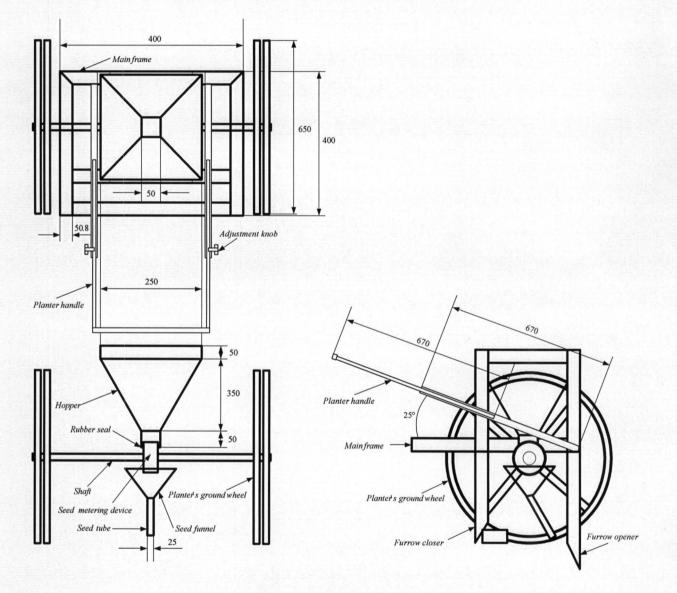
Diagram of the seed planter showing all the necessary dimensions
